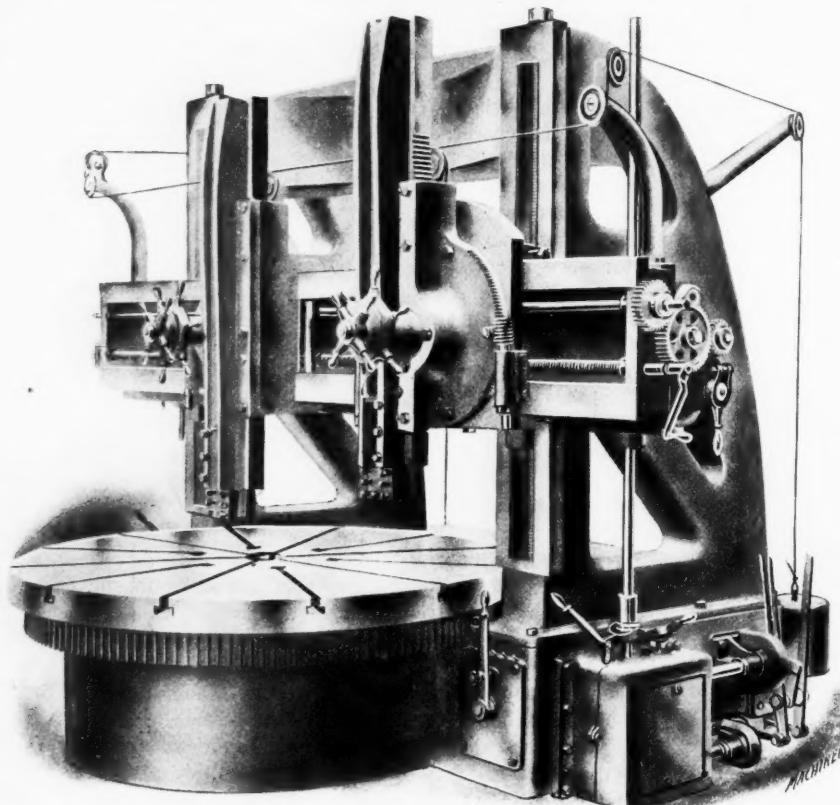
Poole Boring and Turning Mill, 7 to 14 feet Swing.
